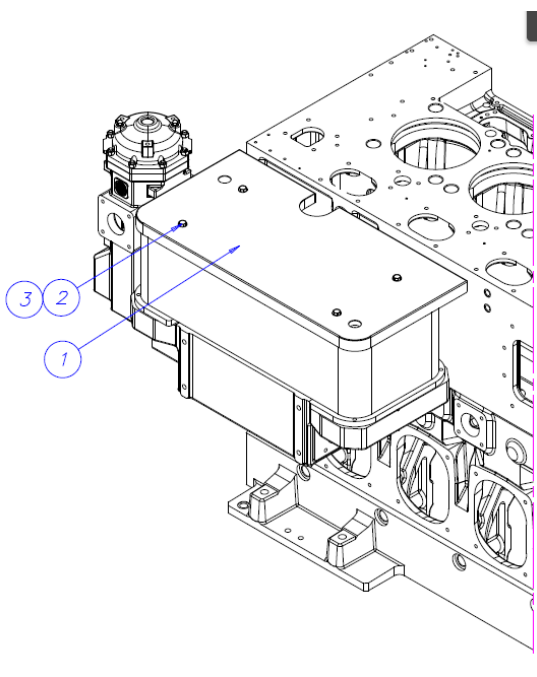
Part of a drawing, before clean-up. (Wärtsilä Drawing, 2013)
